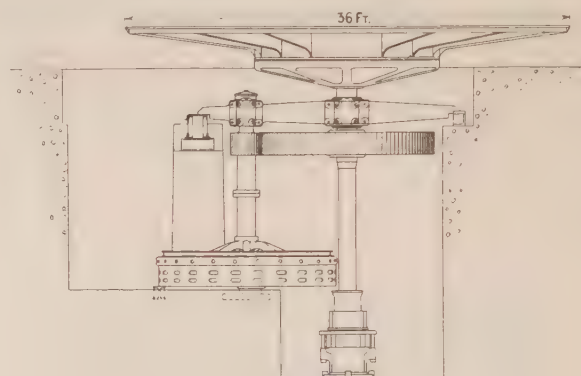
GENERAL CROSS-SECTION, GRINDING AND POLISHING MACHINE
